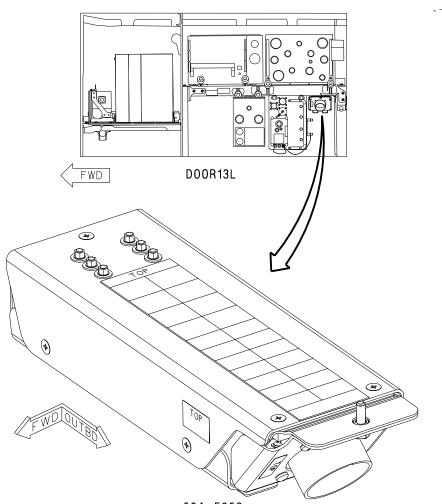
No. 3 Relay Panel Assembly - 52A-E059 - 165222 AND UP; ALSO 163985 THRU 165221 AFTER F/A-18 AFC 236 (Sheet 1)
